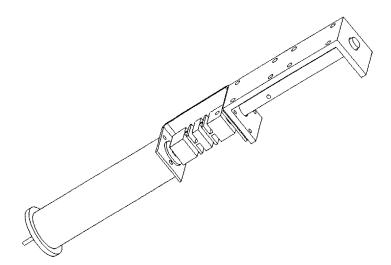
View of CAD model of Maxon motor assembly for Puck Depositing Module
